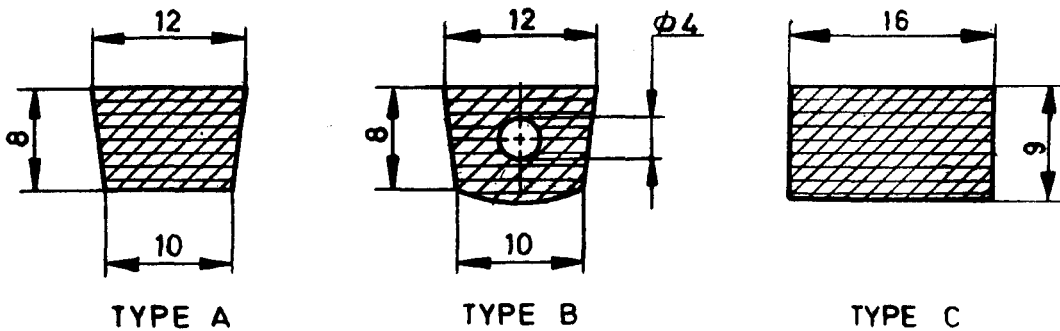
CROSS-SECTIONAL DIMENSIONS OF GASKETS
